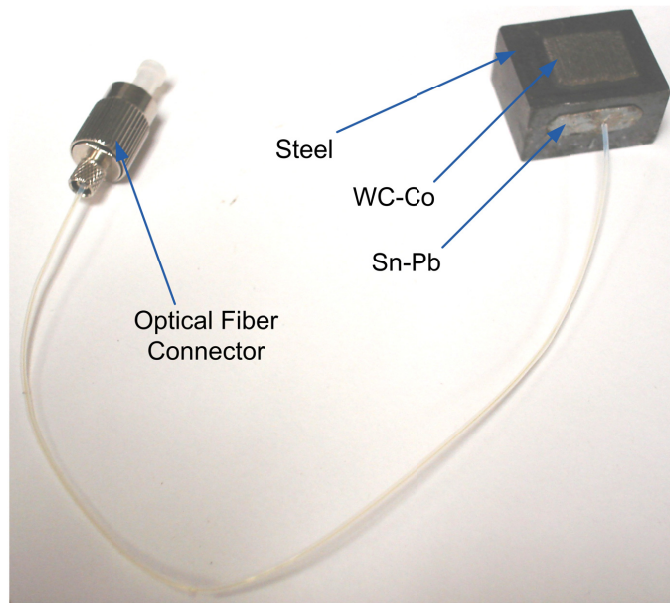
Prototyped sample with metal-embedded FBG using casting and the LSFF process
